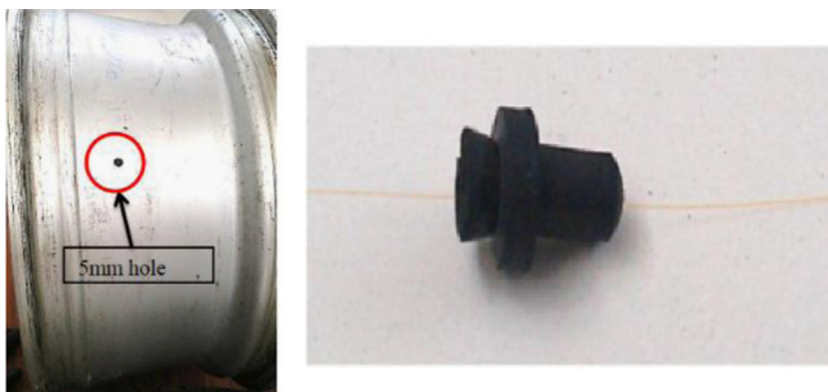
The rim needs to be drilled and the hole sealed with a proper rubber-valve.
